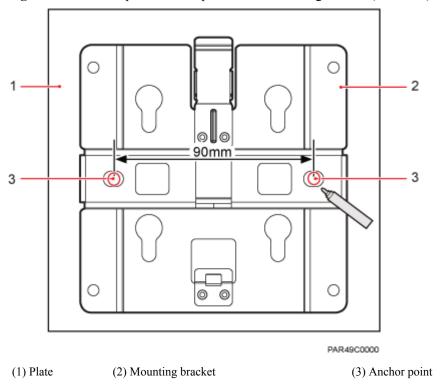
Anchor points on the pRRU3901 mounting bracket (unit: mm)
